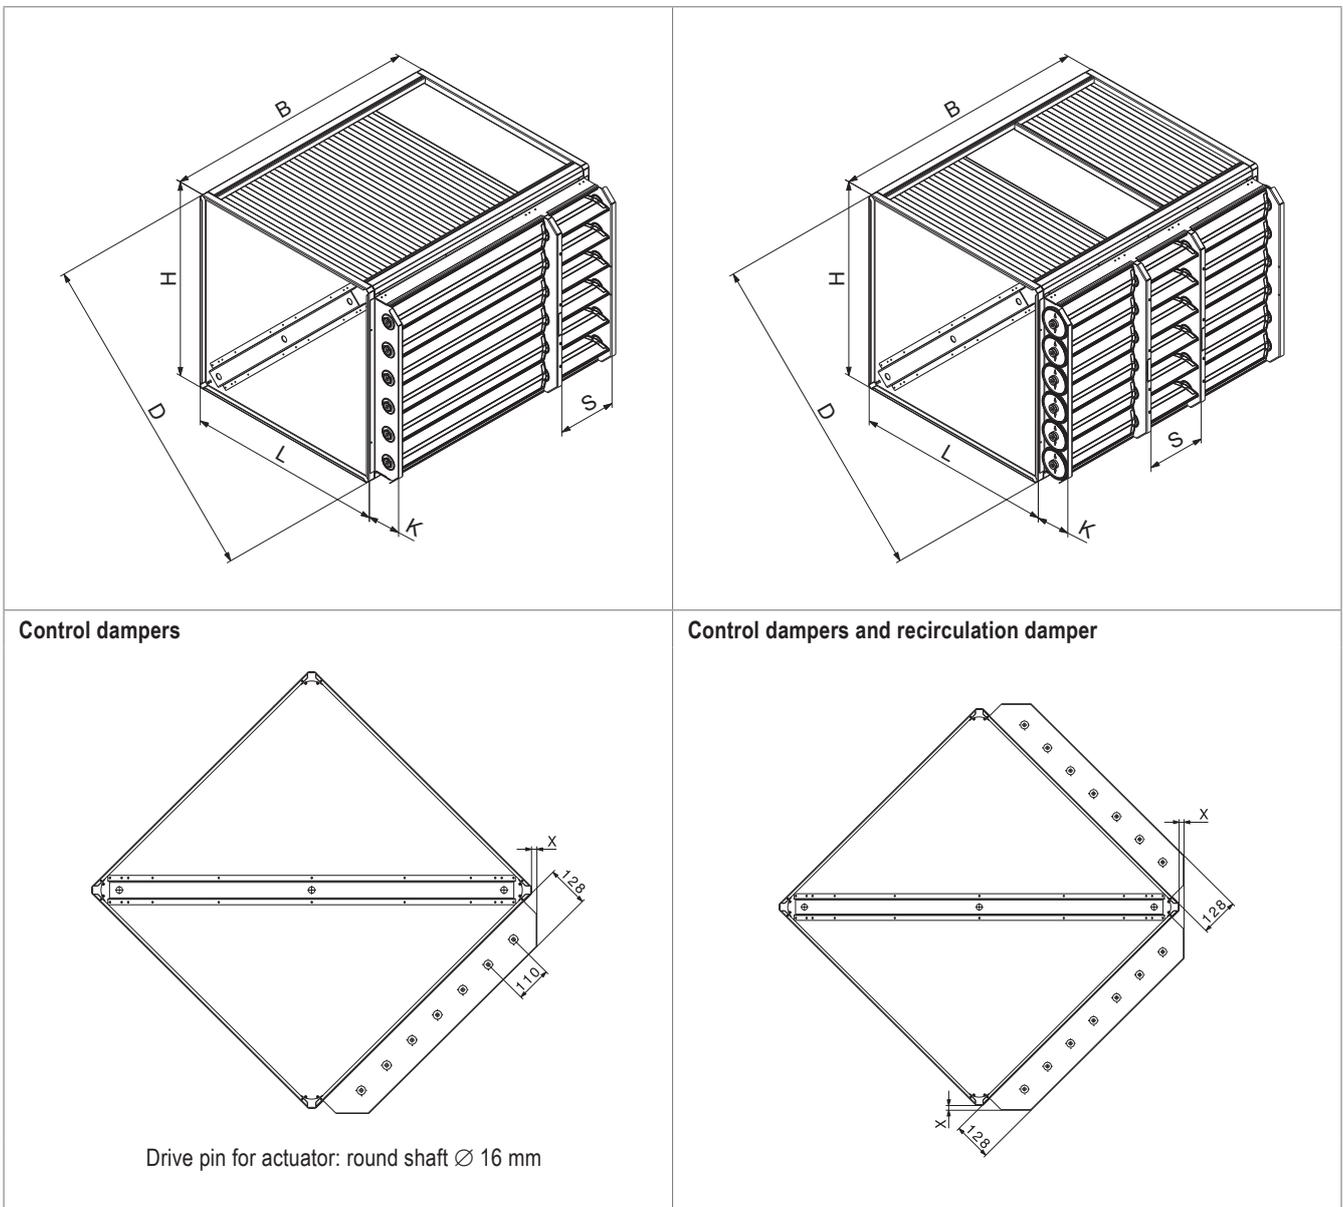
Dimension sheet for design F plate heat exchanger with dampers (dimensions in mm)
